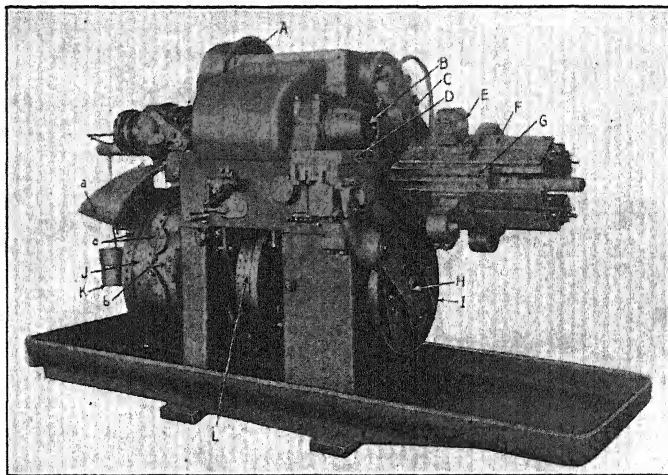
A Rear View of the 7/8-In.-Dia. Capacity Single-Spindle Model A Cleveland Automatic Screw Machine.
